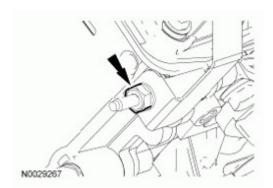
Locating Oil Level Indicator Tube Support Bracket Nut Courtesy of FORD MOTOR CO.
